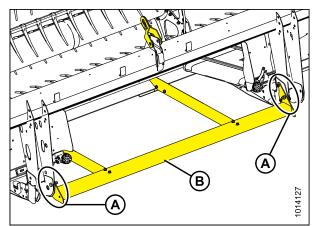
Lower Support (35- to 40-Foot Shown)
